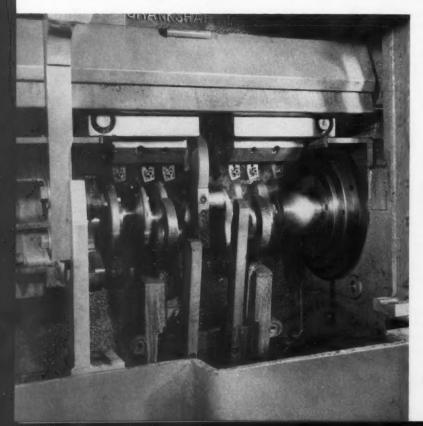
Counterweights are turned and chamfered as the crankshaft is supported by hydraulically operated pot chuck, collet, and steadyrest in this lathe.
